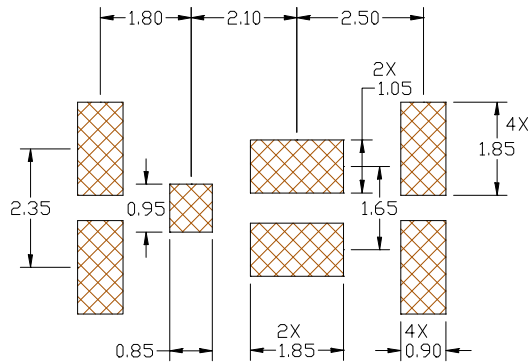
Recommended PCB Pad Layout for ICEPak 6.3x4.9mm-C
